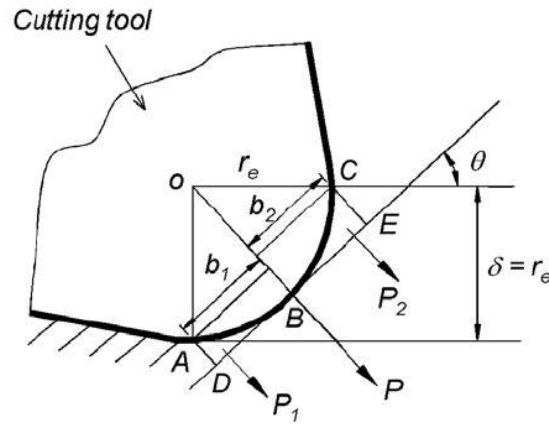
Contact between tool nose and the workpiece material in Region 2 [23]
